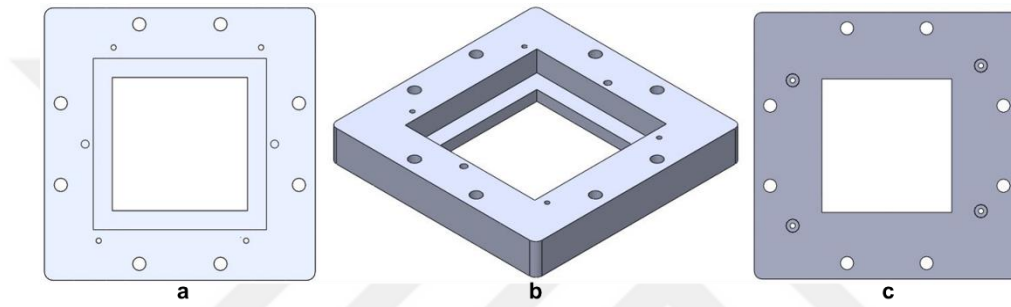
Solid drawings of the end plate; a) outer section, b) perspective, c) inner section
